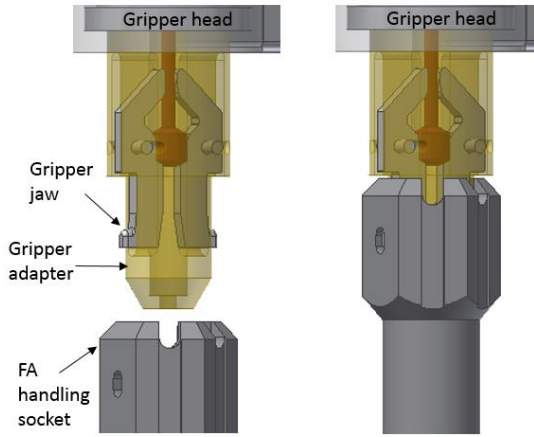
FA gripper in a disengaged view (left), and FA engaged in the gripper (right)
